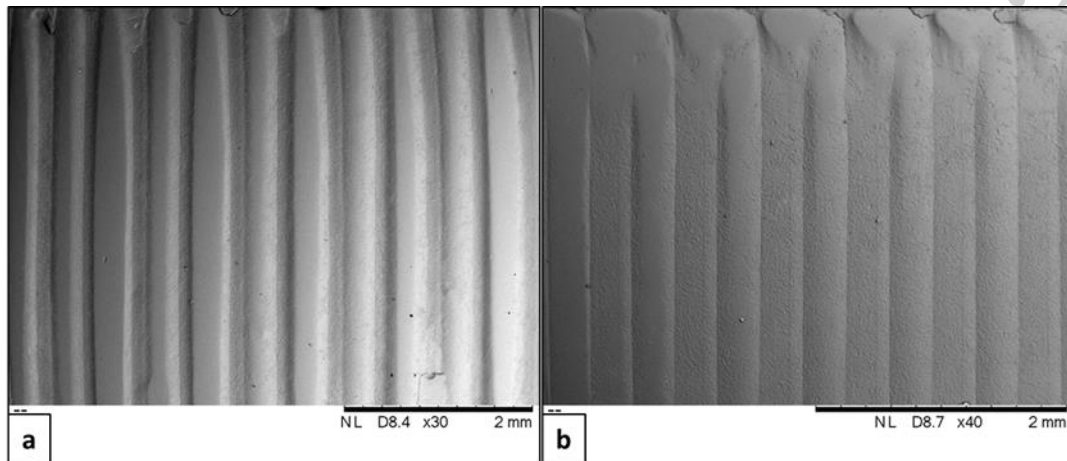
Top surface of multi-layer monolithic B_4C samples printed using the 584 μm (a) and 406 μm (b) extrusion nozzles.
